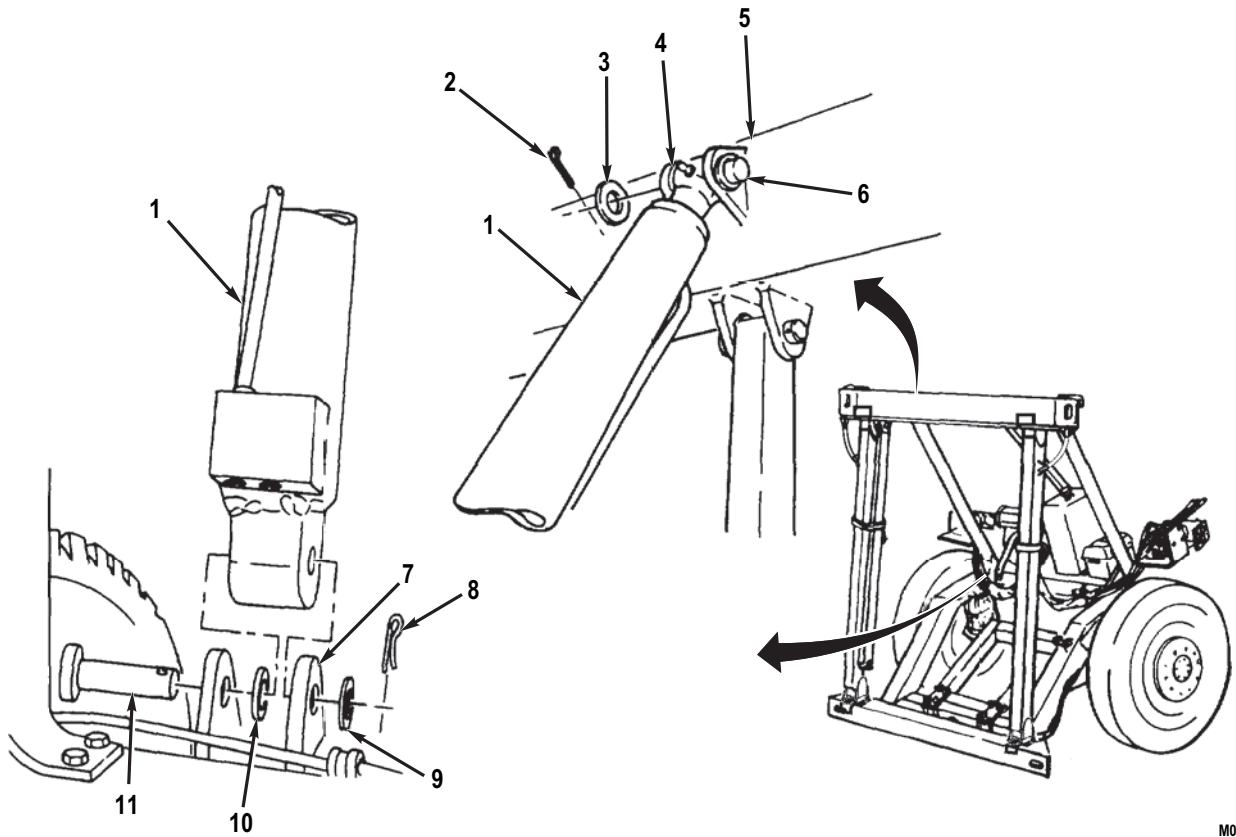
Hydraulic Lift Cylinder Check Valve Removal.
